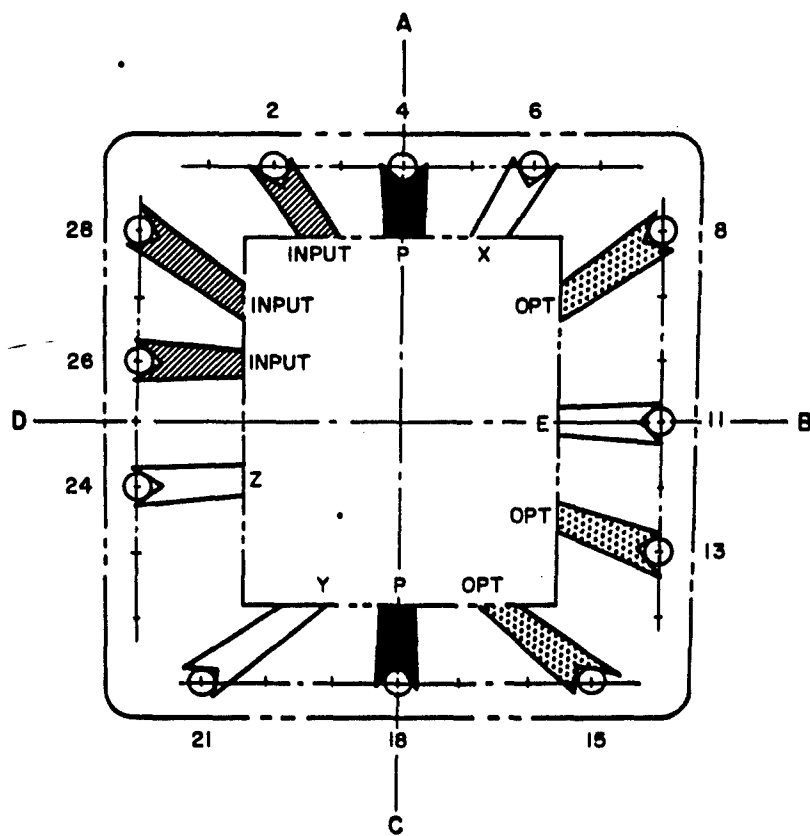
12-Lead Integrated Circuit Flat Package
